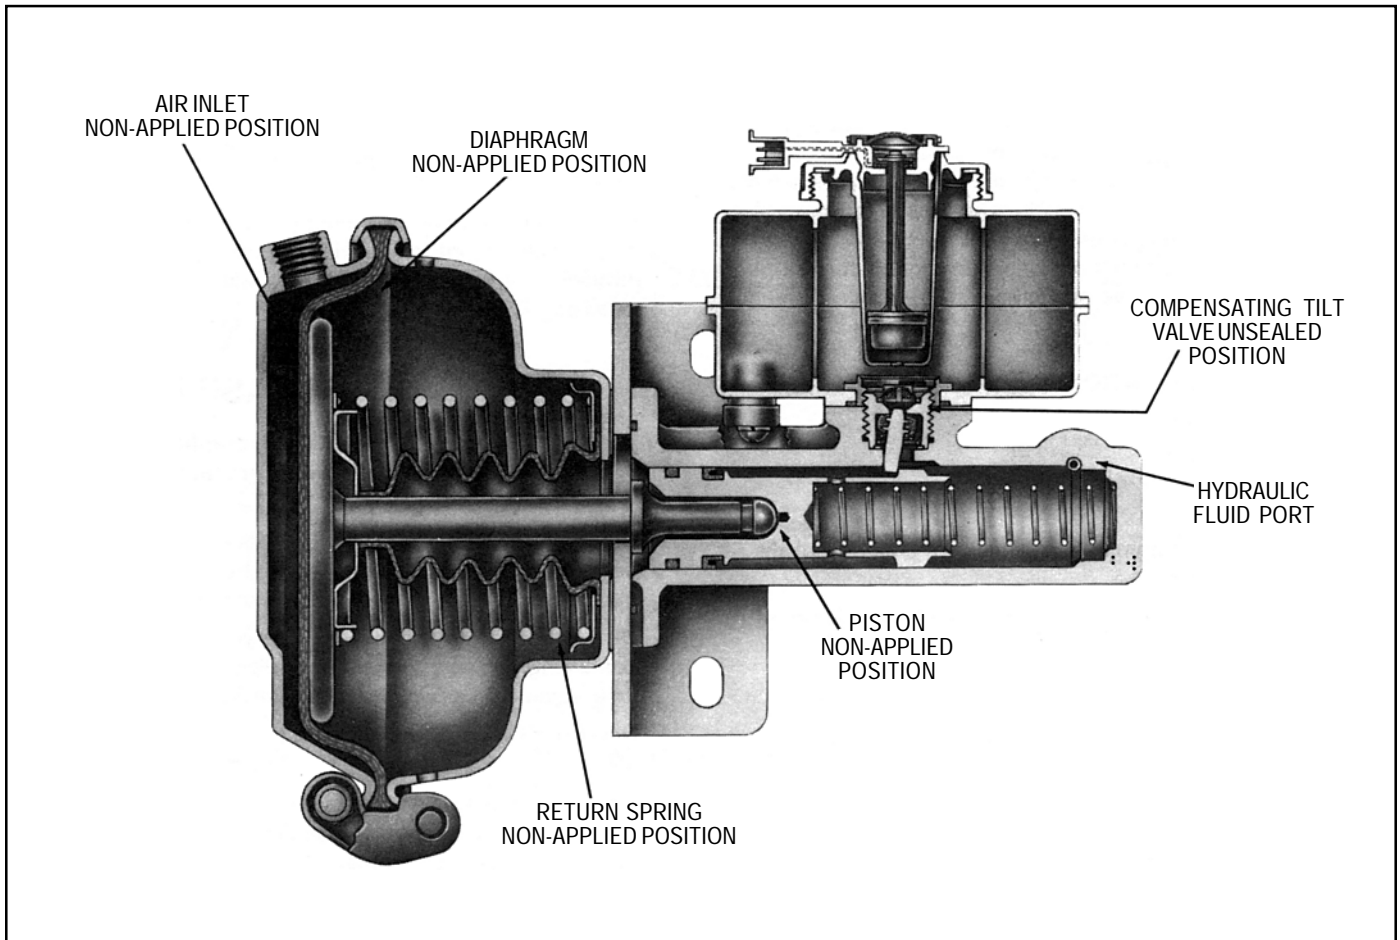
CUTAWAY VIEW OF RELEASED POSITION
